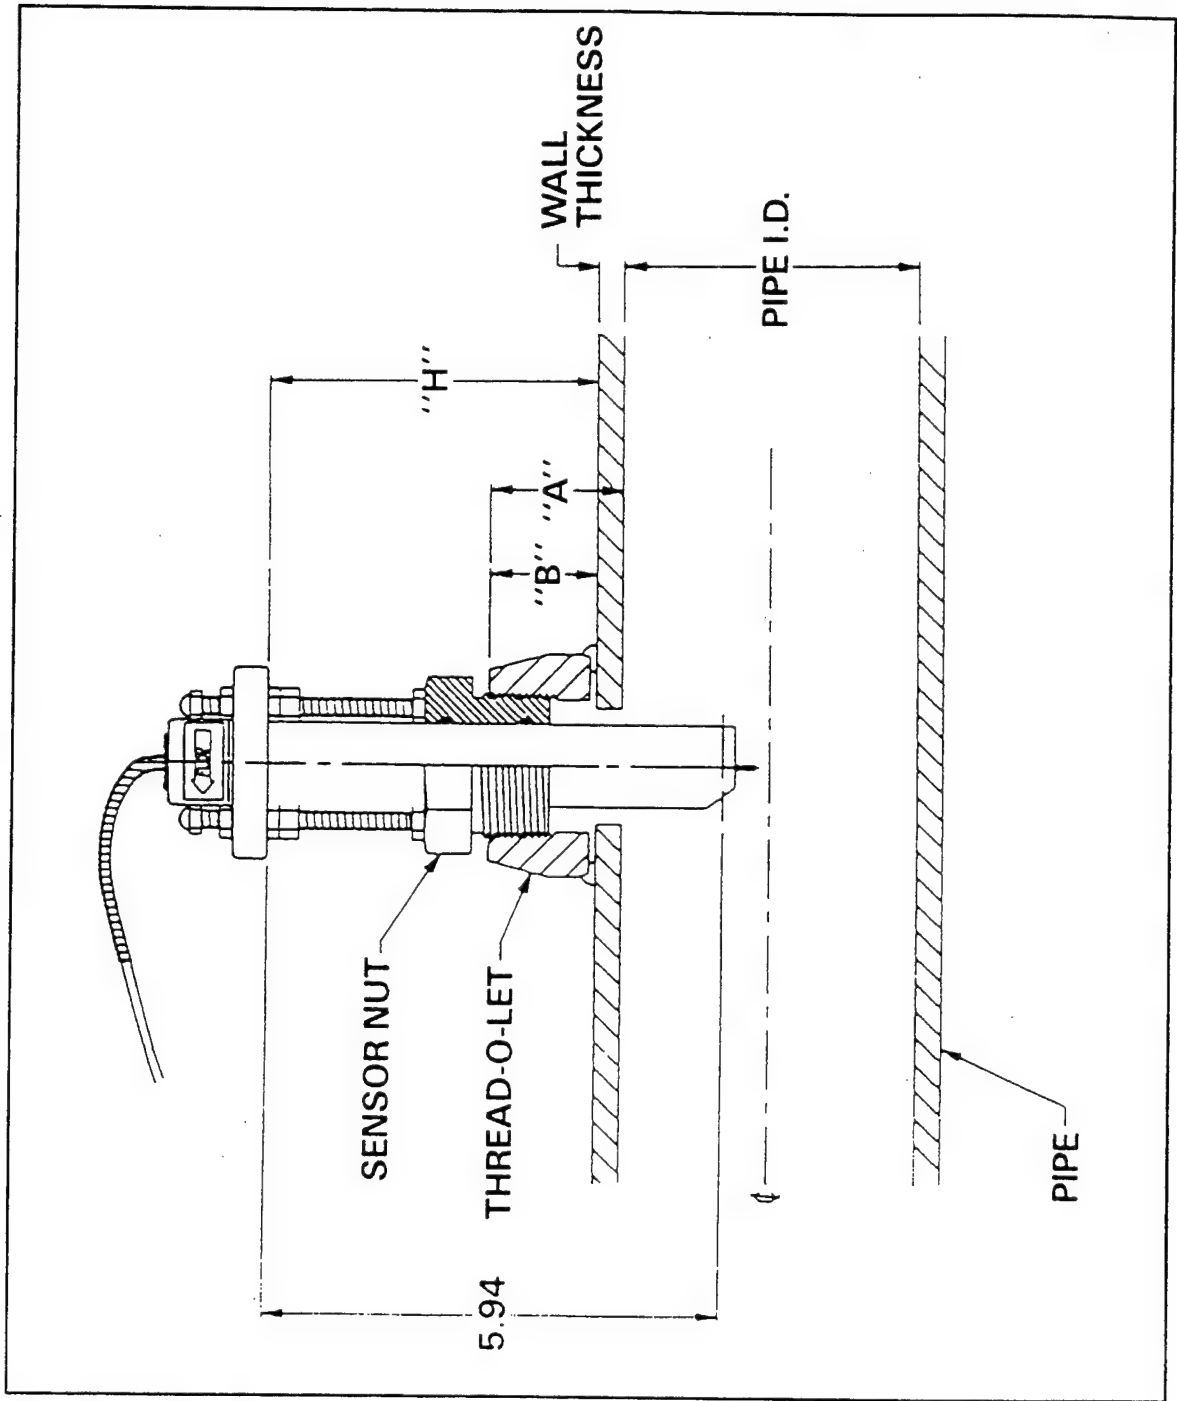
FP-6000 Dimensions for Calculating "H" Dimension
